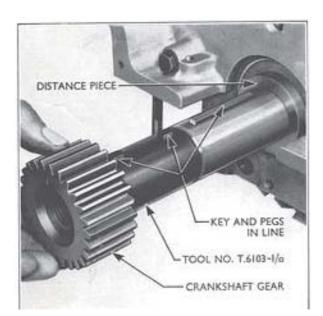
Fitting the Crankshaft Gear to the Alignment Adaptor
